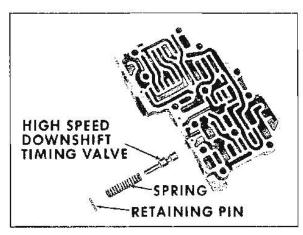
B-48 High Speed Downshift Timing Valve – Exploded View
